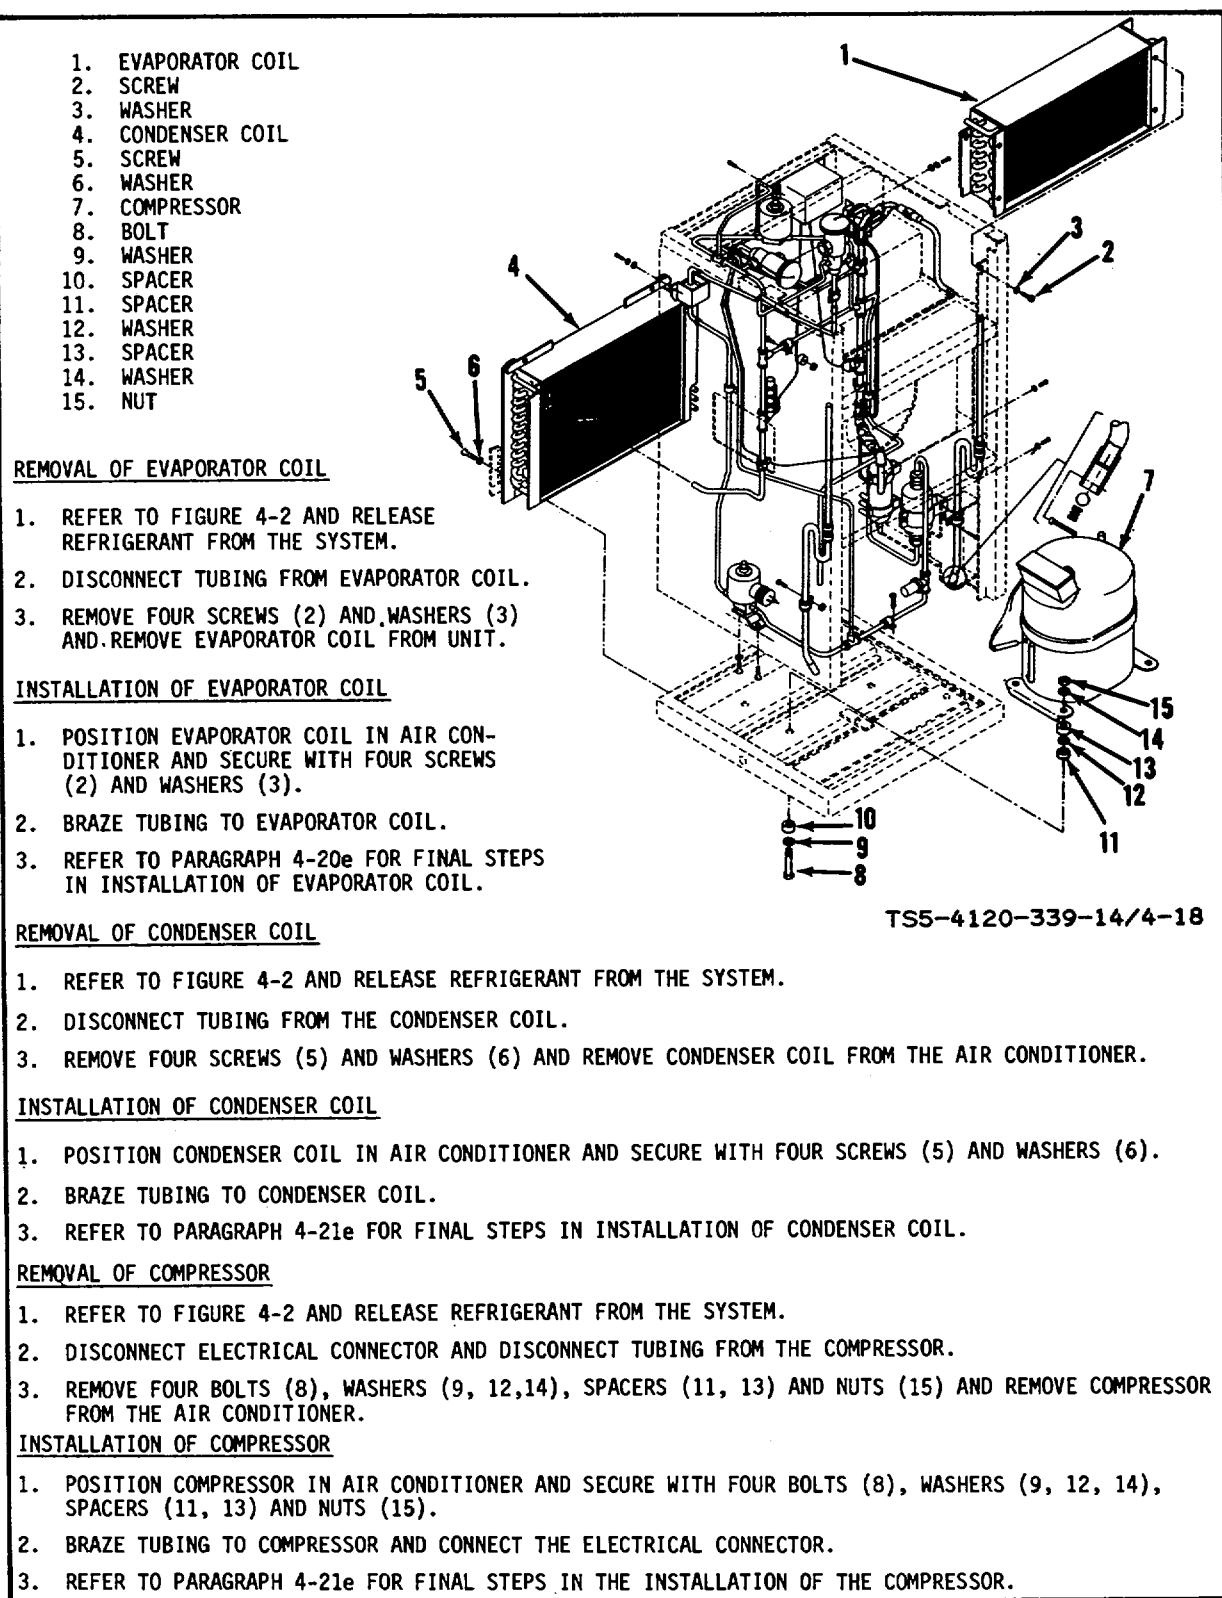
Removal and installation of evaporator coil, condenser coil and compressor
